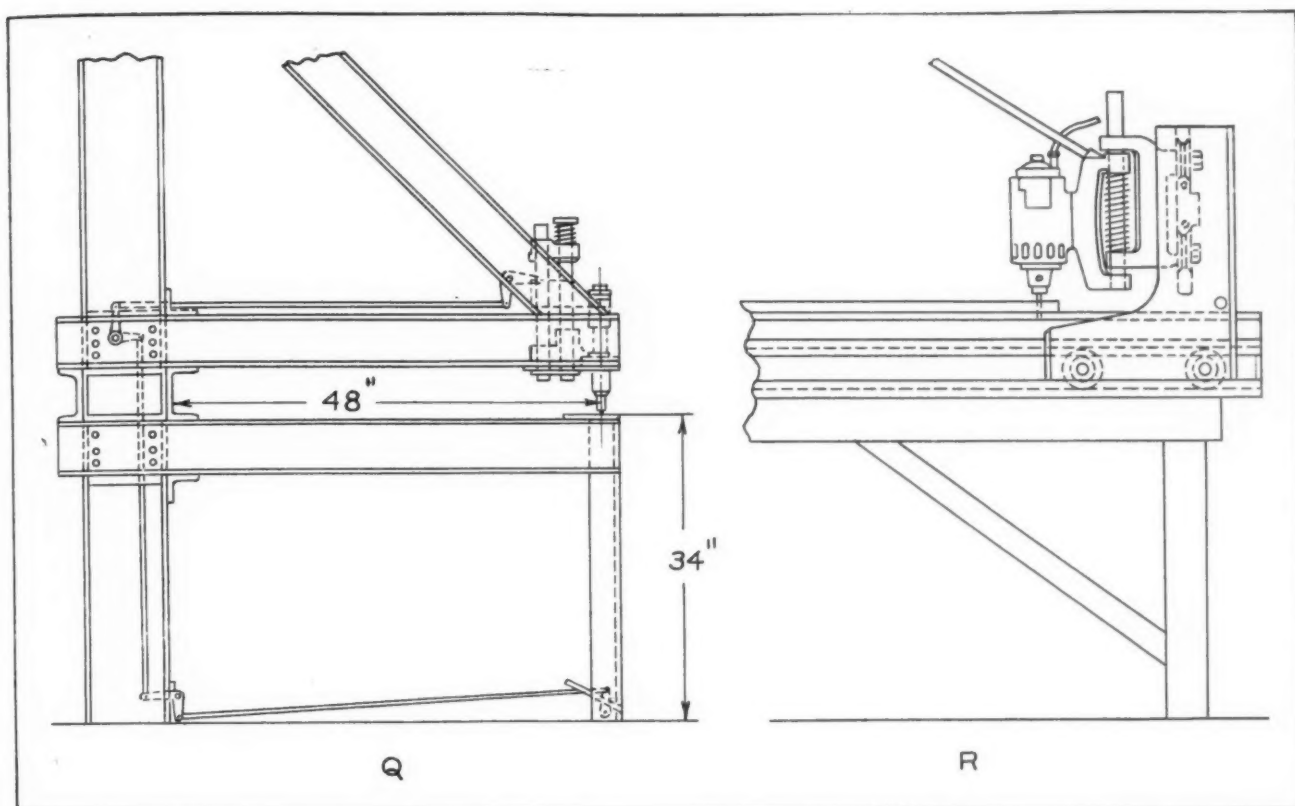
"One-shot" Riveting Gun Rigged up on a Steel Frame for Use in Flaring Rivet Holes in Sheet Material up to 48 Inches Wide, and Arrangement for Drilling Stacked Sheets
